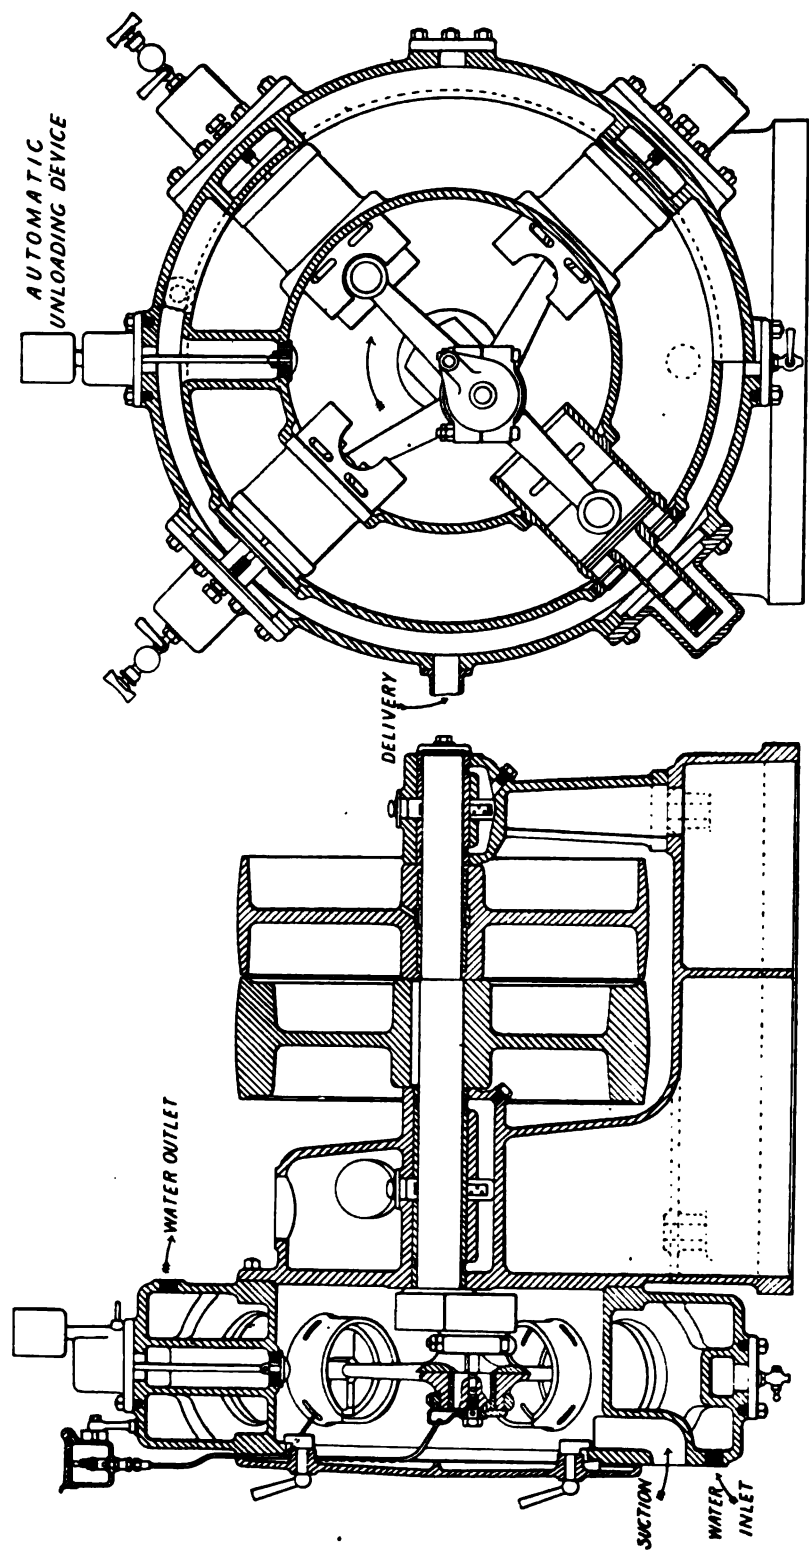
Quadruplex Single-Stage Air Compressor. Reavell & Co., Ltd., Ipswich.
